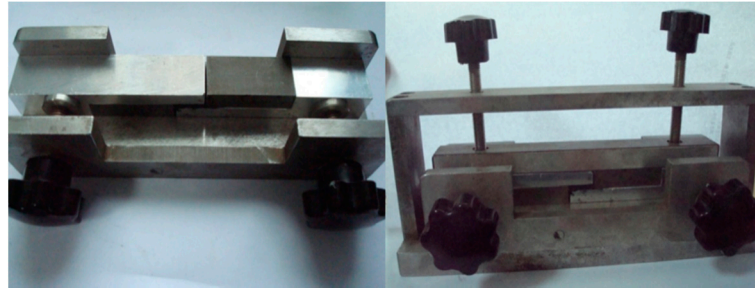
Diagram of lateral fastening jig (left) and gantry clamping jig (right).
